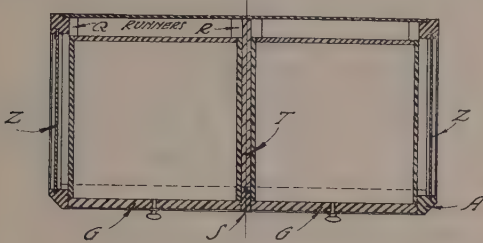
SECTIONAL PLAN AT DRAWERS.
